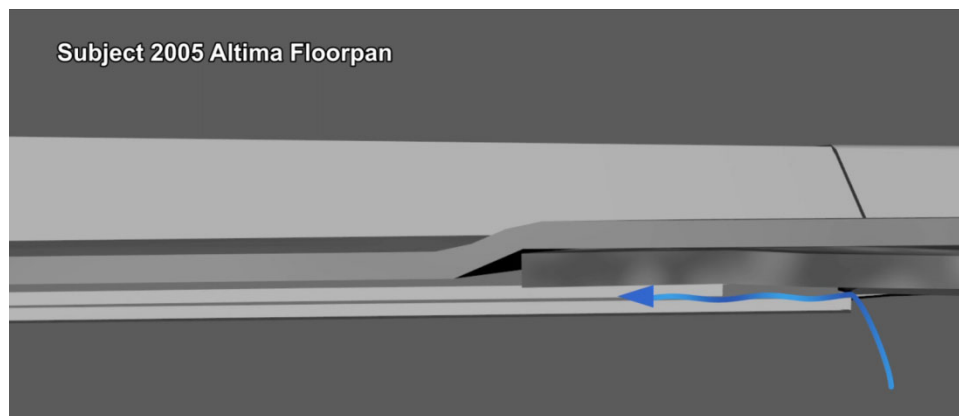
Exploded view of floor pan construction based on examination of floor pan structure of a 2005 Nissan Altima vehicle.
